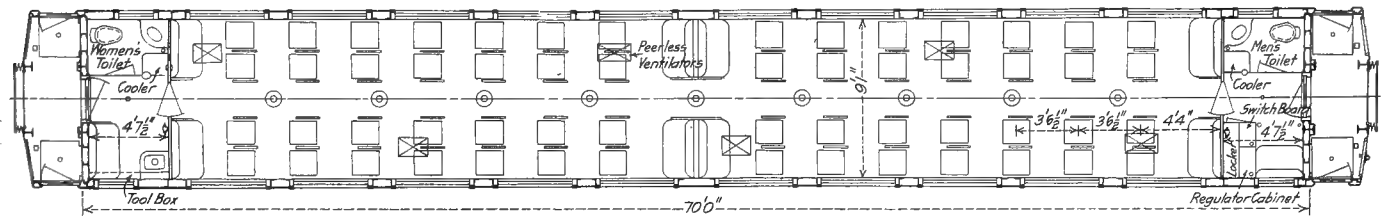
Floor Plan of Atchison, Topeka & Santa Fe Steel Chair Car Shown in Figs. 378-380. Builder, The Pullman Co.
